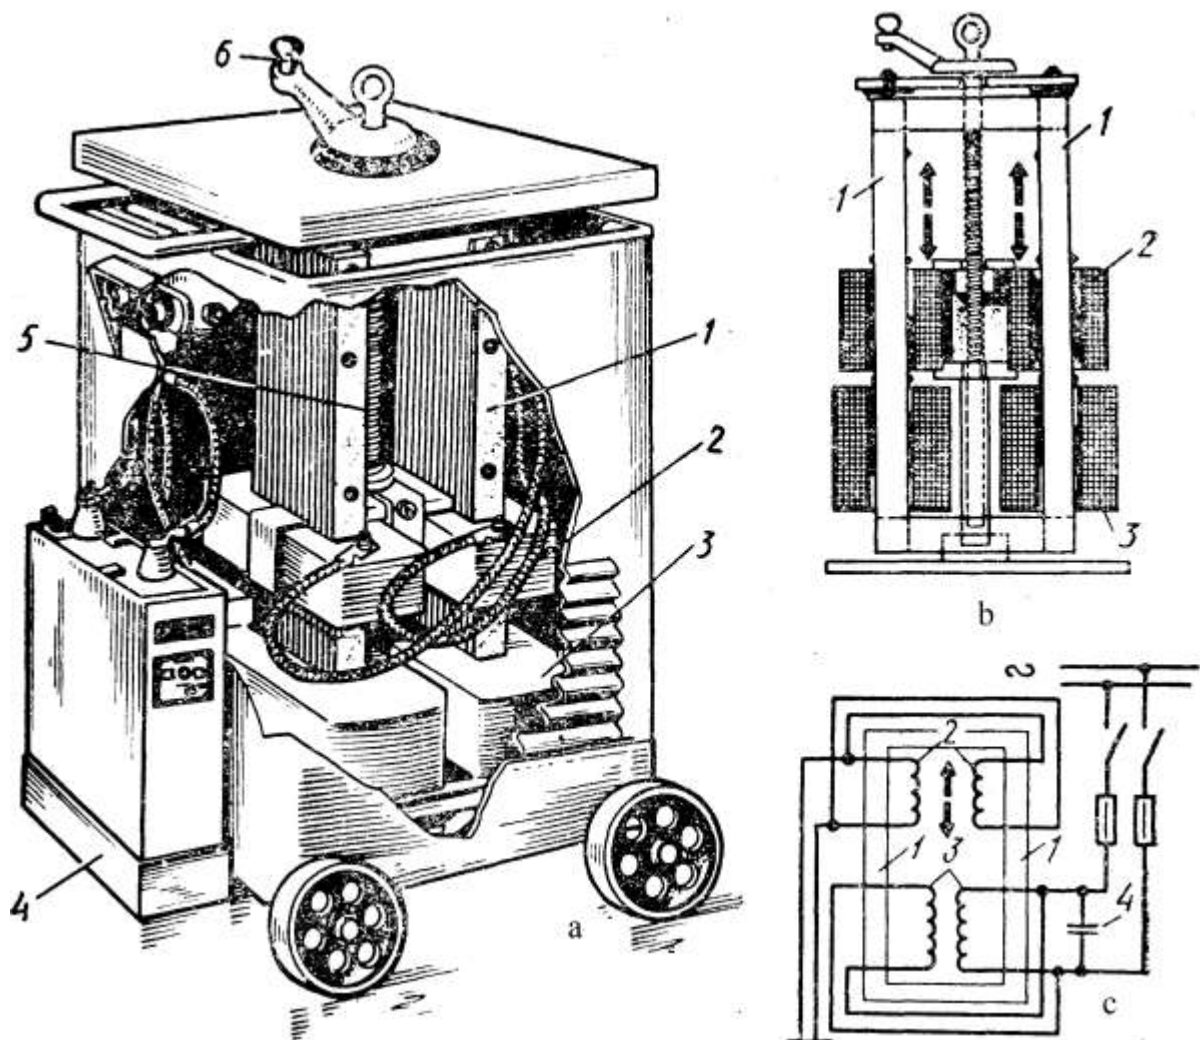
Scheme of the welding transformer TSK-500:
